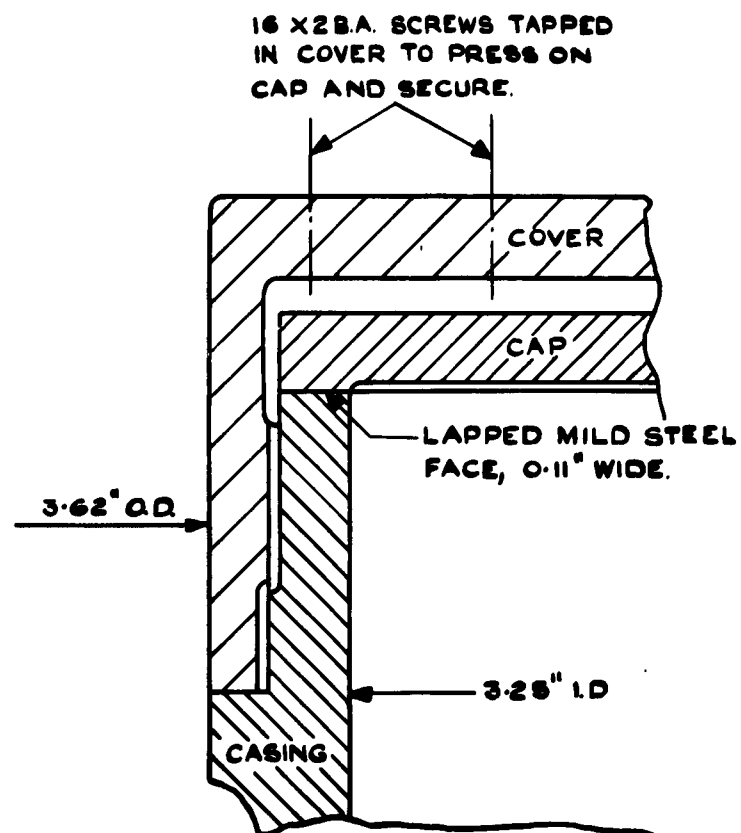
SECTION OF FLAT LAPPED SEAL WITH SCREW CAP
